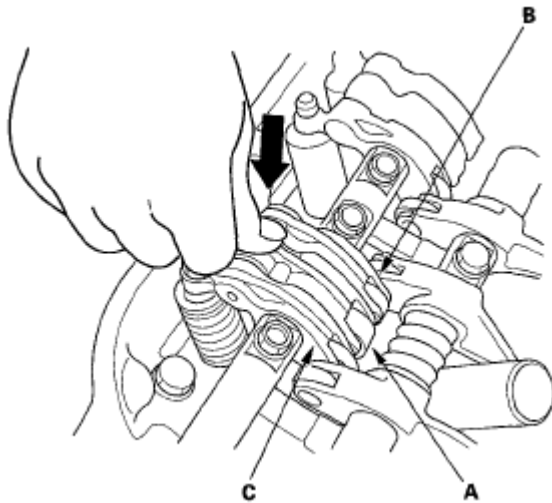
Pushing Intake Mid Rocker Arm For No. 1 Cylinder
